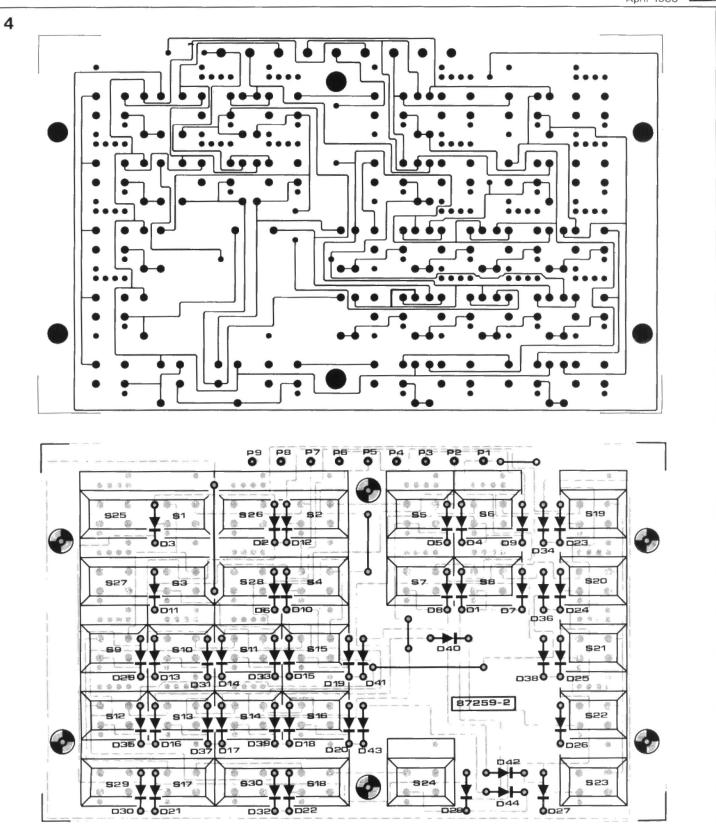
Layout of the keypad PCB (not available through the Readers Services).
